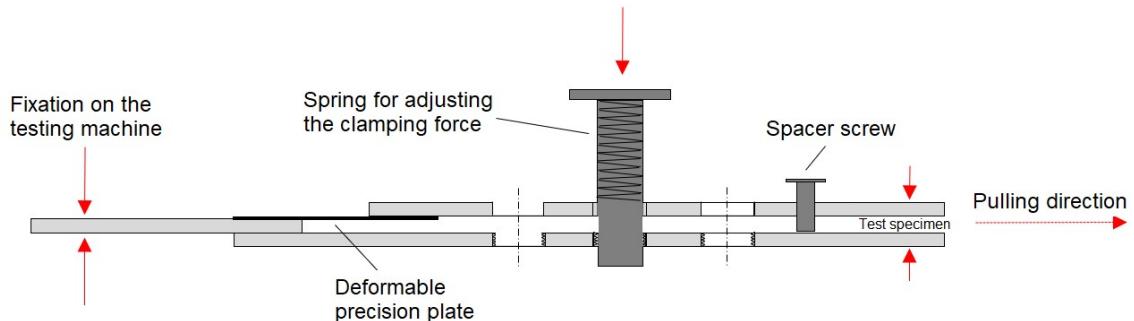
Schematic illustration of the clamping tool used for the tensile tests.
